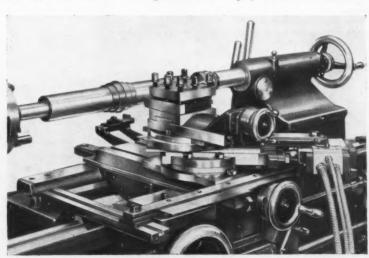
Set-up for Turning Shafts and Other Shouldered Workpieces
